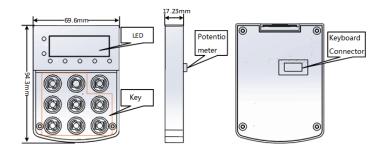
Keyboard Operator Outline and Installation Dimensional Drawings
